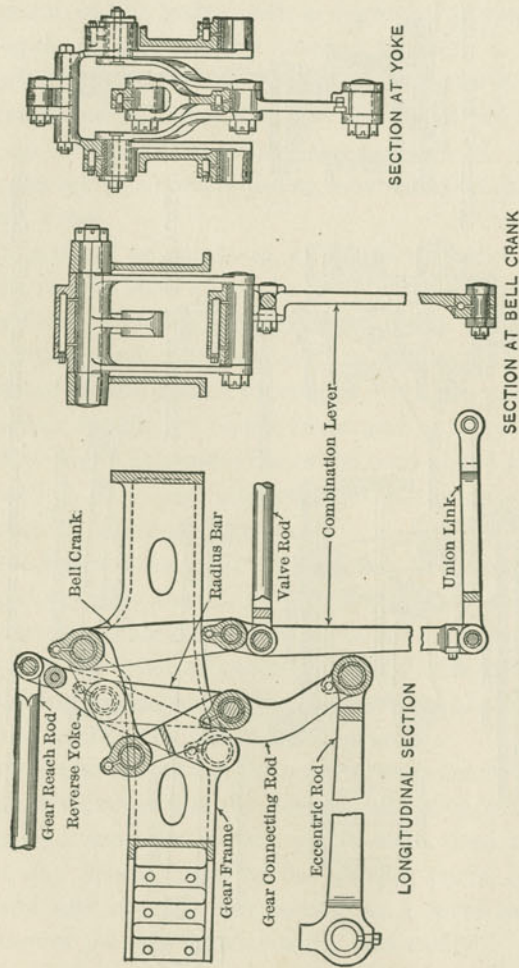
Details of Baker Locomotive Valve-gear for Inside Admission
